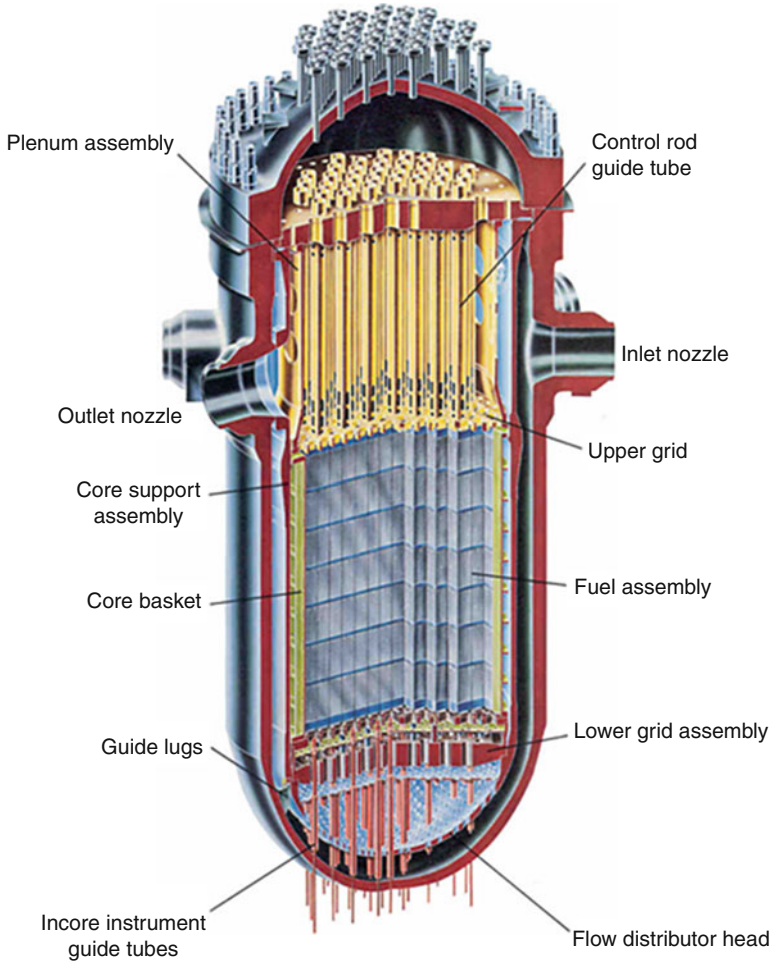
Pressurized water reactor vessel showing fuel core, upper and lower grid assembly, and core internals (Courtesy AREVA)
